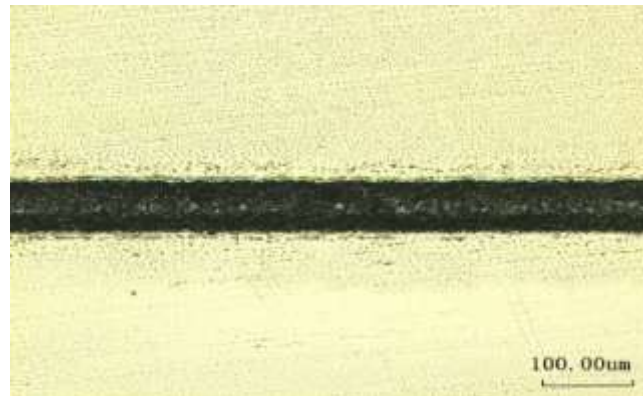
(b) Top view from hybrid laser-waterjet cutting [13]
